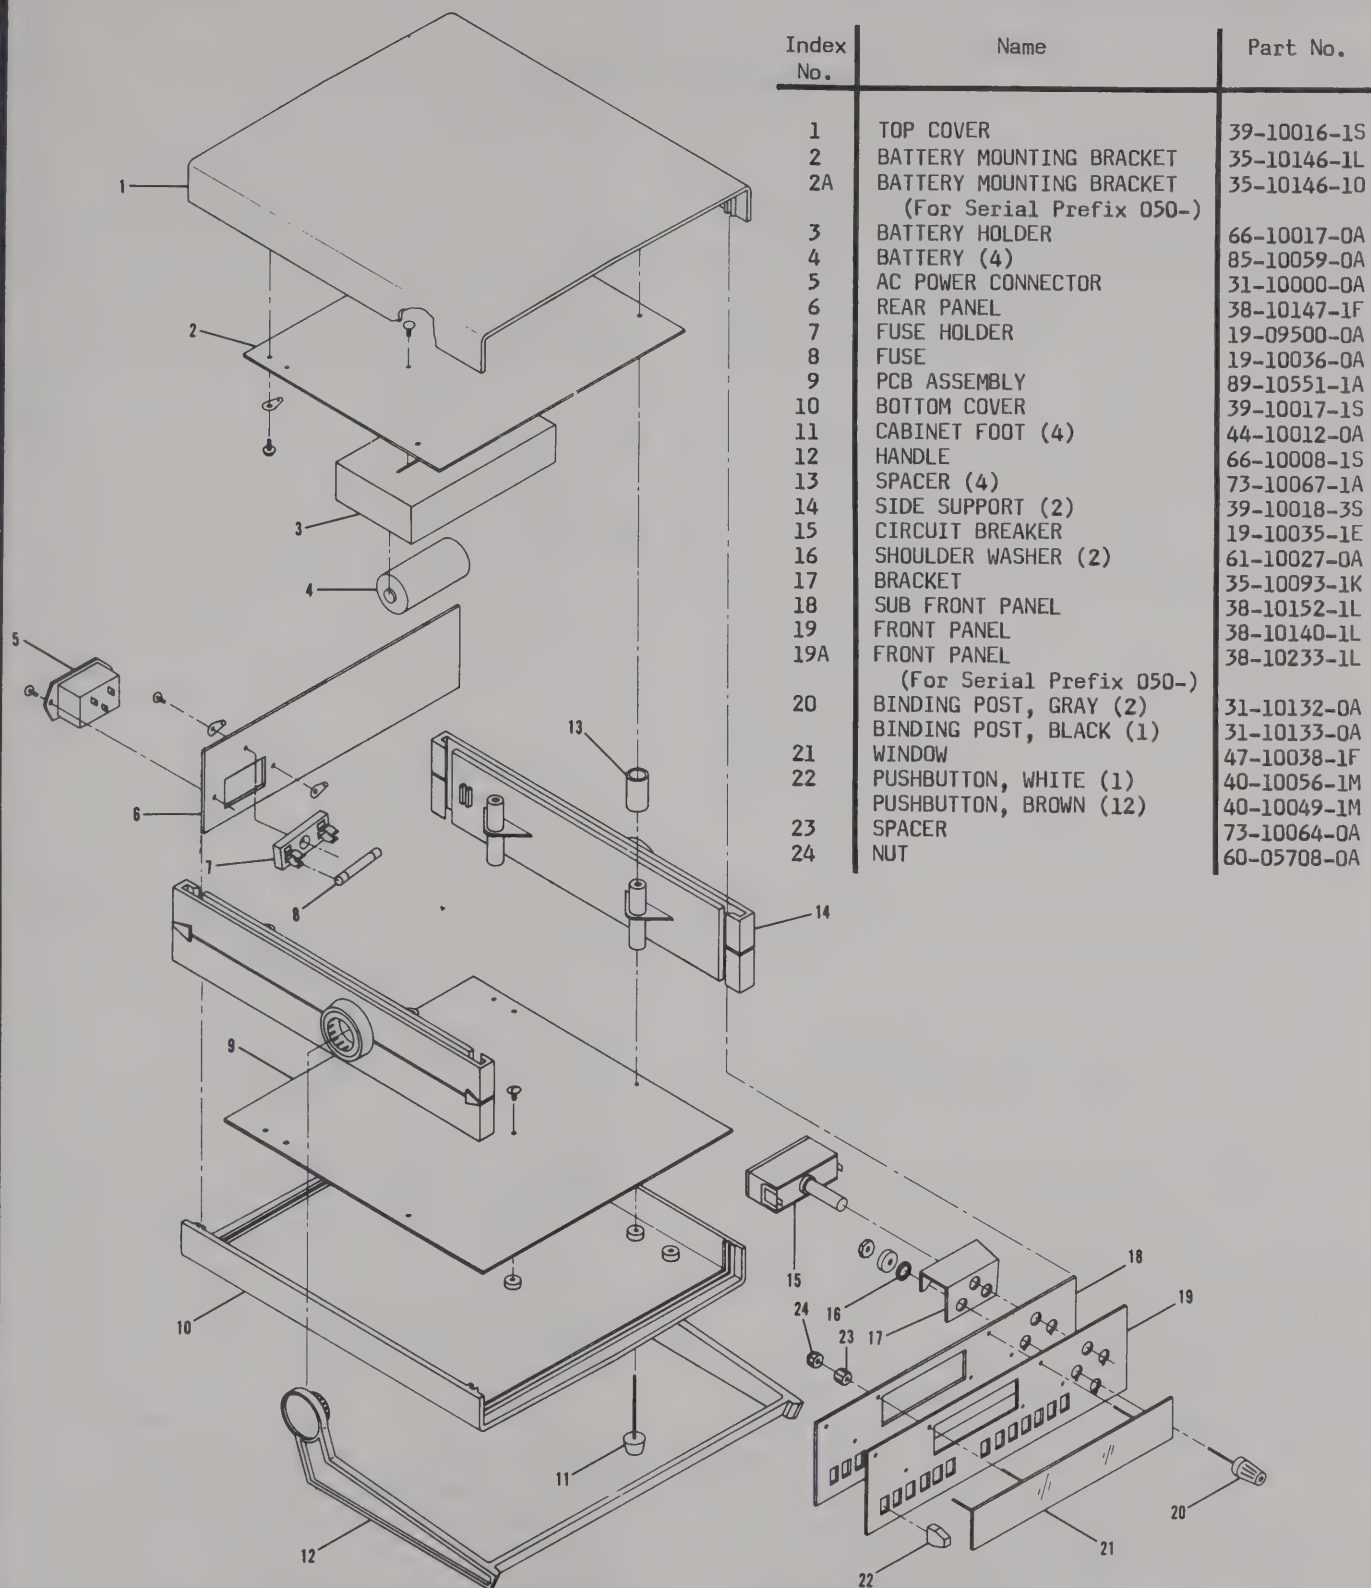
Model 3028B, Case Assembly, Exploded View
